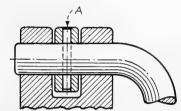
Swinging rod retained by pinned collar A. Both lugs are integral with the casting.
